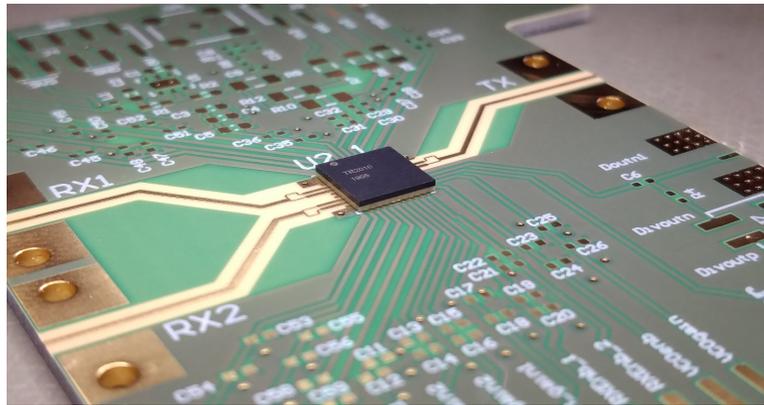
60-GHz TR2 6 x 6 mm² LGA package mounted on the designed evaluation board.
